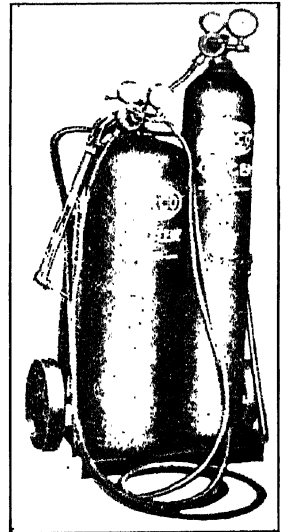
Portable welding outfit. (Air Reduction Sales Co., New York City.)
